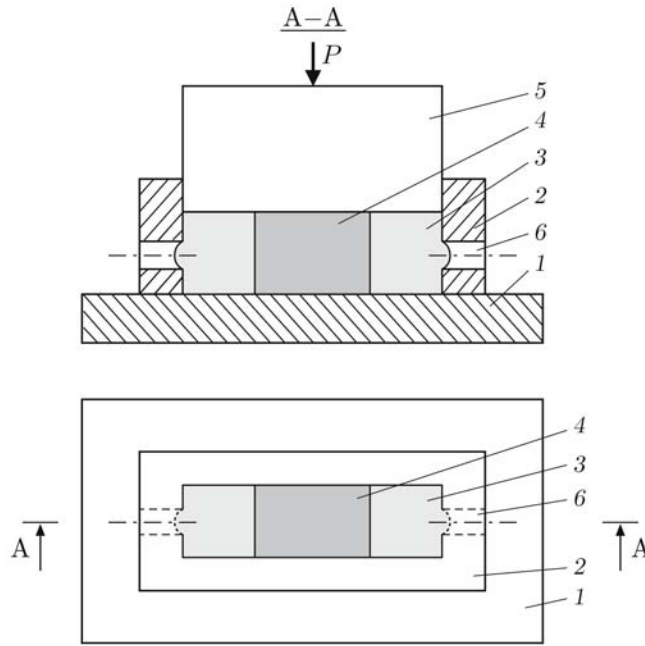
Setup for deformation of samples: 1) support plate; 2) die; 3) disposable insert; 4) sample; 5) punch; 6) hole through which the insert material is extruded.
